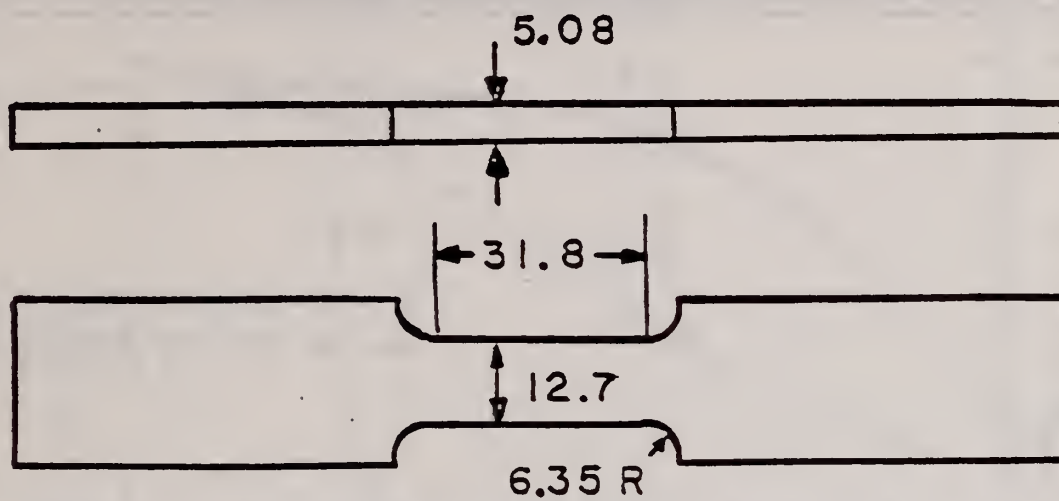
Schematic of tensile test specimen. Dimensions are in mm.
